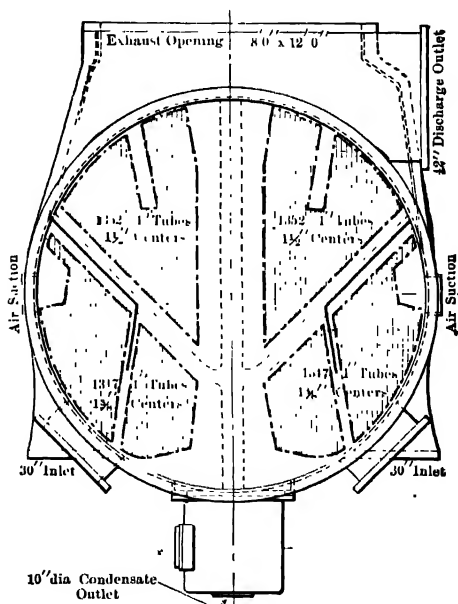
Tube Sheet — C. H. Wheeler "Duplex" Condenser.
